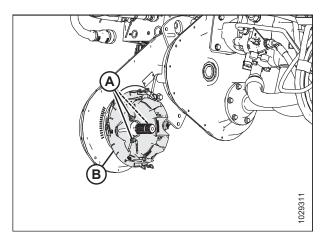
Completion Gearbox Chain Tensioner Cover
